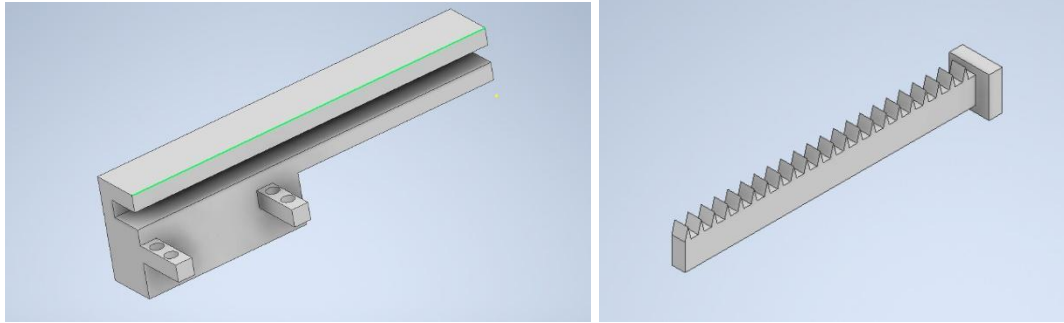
Rack and pinion based linear actuator, housing (left) and rack (right) CAD models
